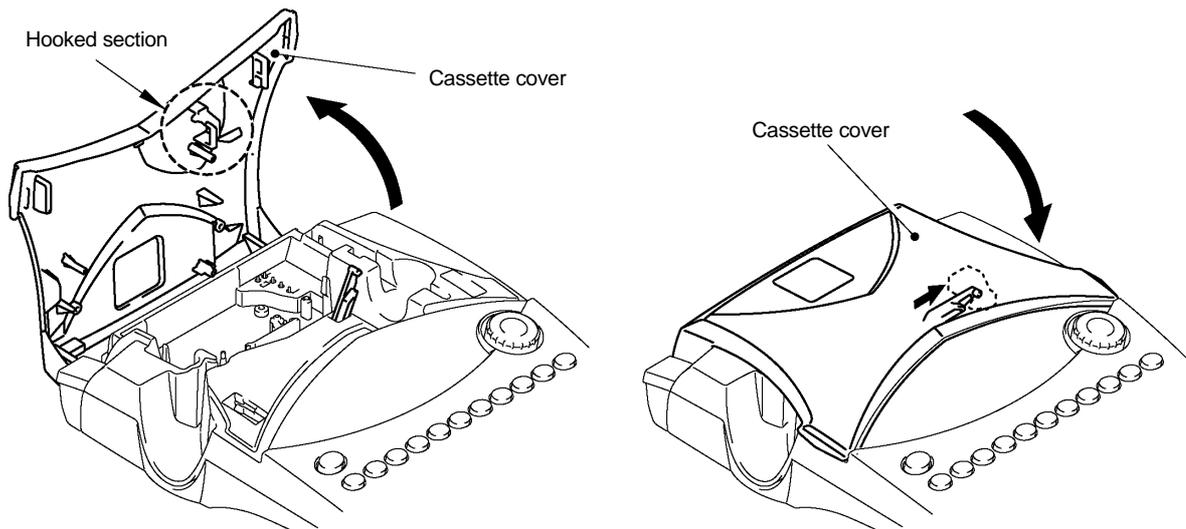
Roller Holder ASSY & Cassette Cover Interlocking Mechanism
